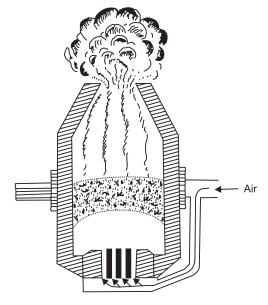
Bessemer Converter for the Manufacture of Steel
